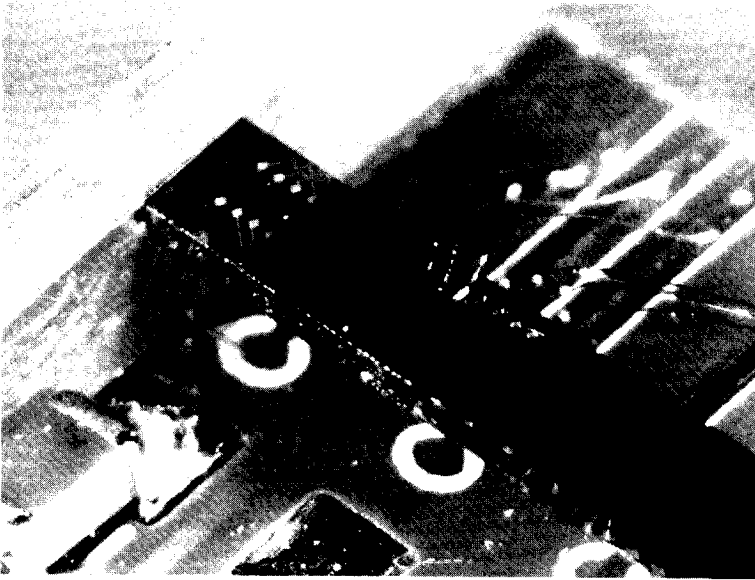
Clamping of a beam and wire-bonding to the PCB. The beam floats 1 mm above the PCB surface. The latter contains gilded bonding pads (top, right) and decoupling capacitors (bottom, left).
